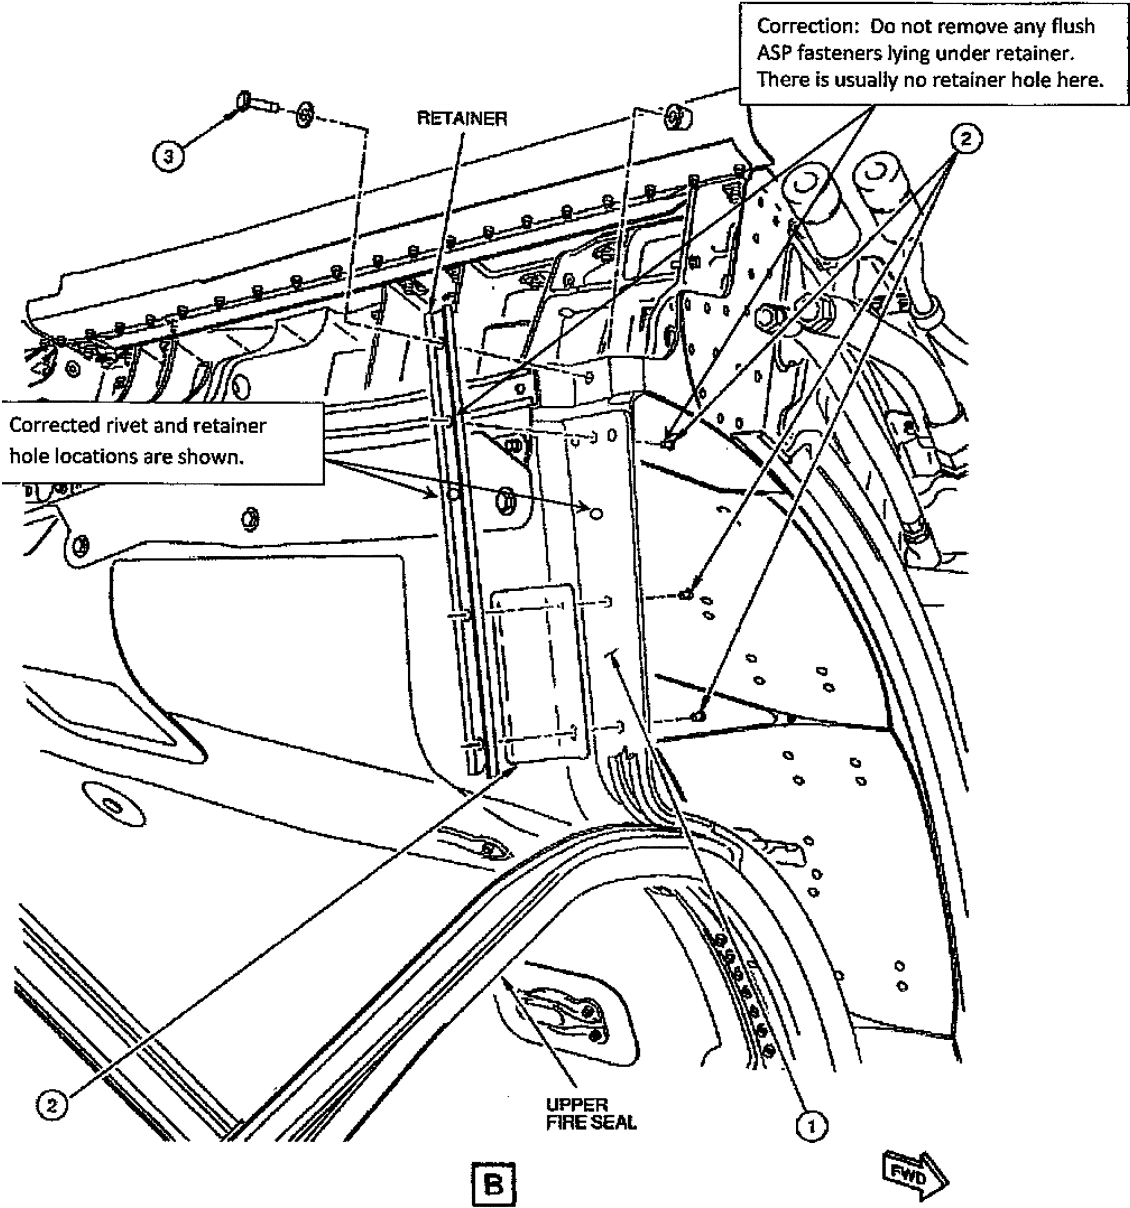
, Fastener Removal of the Retainer Support on the Right Thrust Reverser Half
